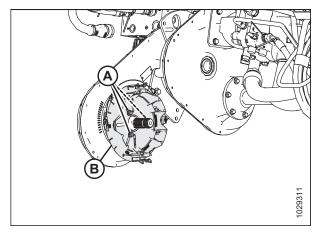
Completion Gearbox Chain Tensioner Cover
